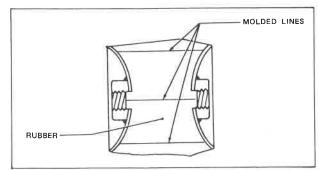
CROSS-SECTION OF RUBBER MOUNT (MOUNTING SANDWICH).
